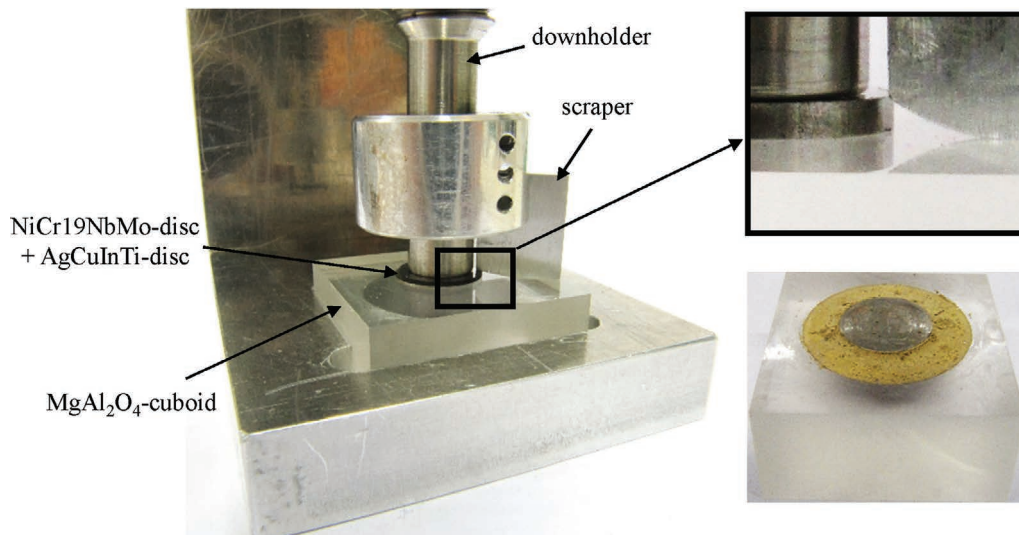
Tool for fixing the brazing specimen and for modeling a specific chamfer (left), complete specimen with MgAl₂O₄, NiCr19NbMo and AgCuInTi-foil and -paste before brazing (right).
